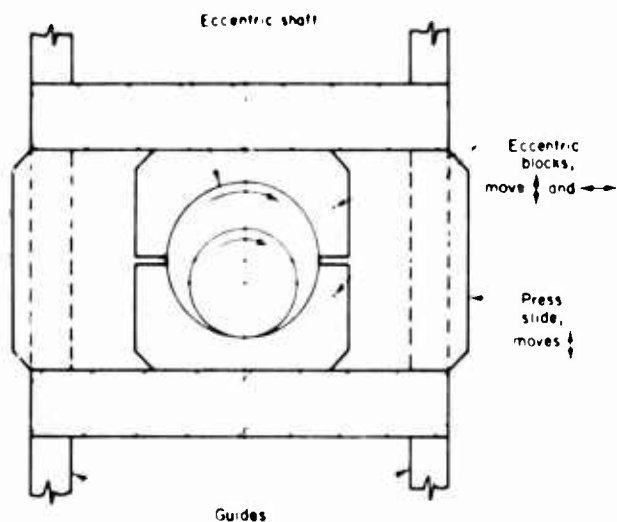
PRINCIPLE OF THE SCOTCH-YOKE TYPE DRIVE FOR MECHANICAL PRESSES(5)
